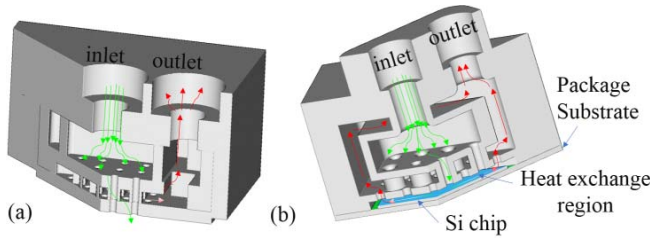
Cooler structure with the pressure reduction of shape optimization. (a) MM cooler. (b) 3-D printed cooler.
